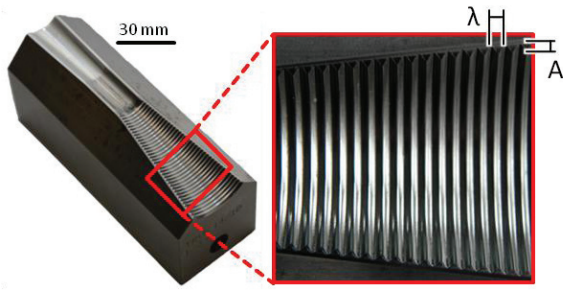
Rotary swaging tool with cosine geometry (T3).
